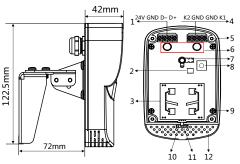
Dimensions - Side View Figure 5. Components - Interior View
